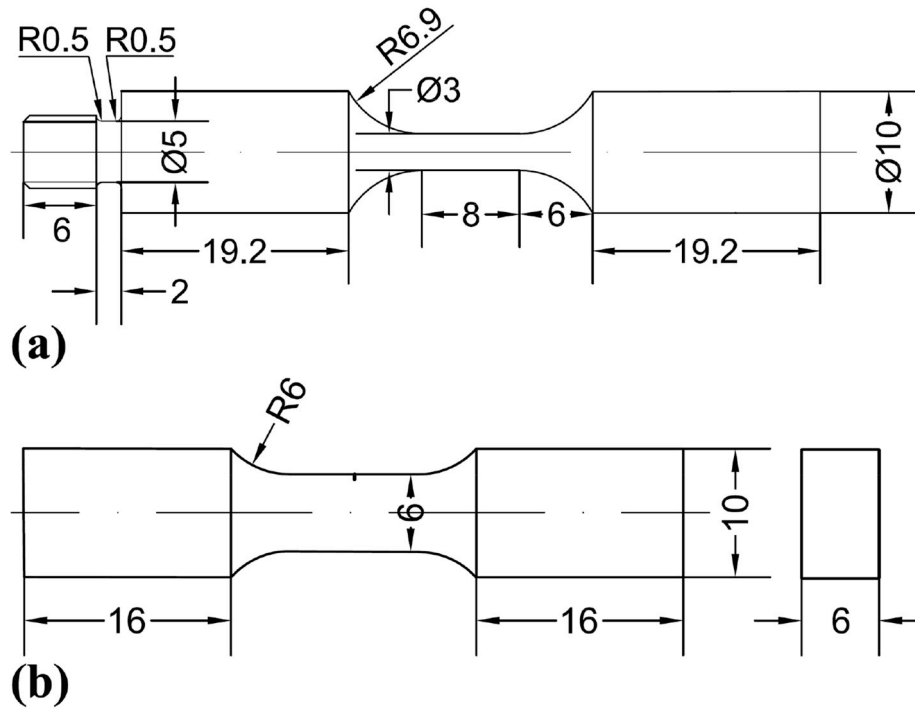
Specimen geometries for fatigue test (in mm). (a) Specimen for bearing steel; (b) Notched specimen for stainless steel with a notch depth of 0.2 mm.
